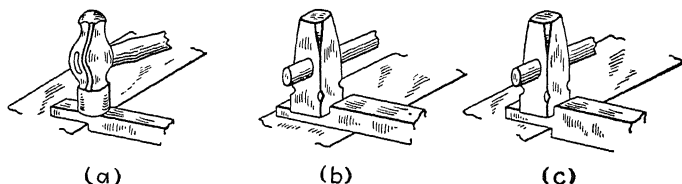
Shouldering. *a*, Shoulder on one side, smaller stock; *b*, shoulder on one side, heavier stock; *c*, double shoulder.
